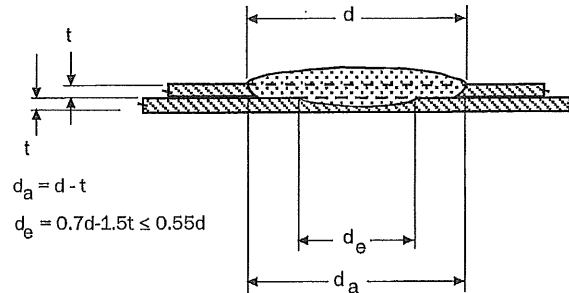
Arc Spot Weld – Sheet-to-Sheet
